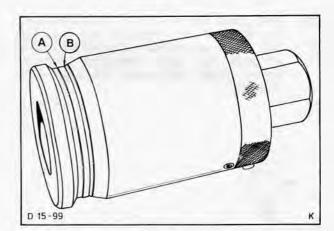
Pre-load sleeve 15–023 A – Mark for new bearings
